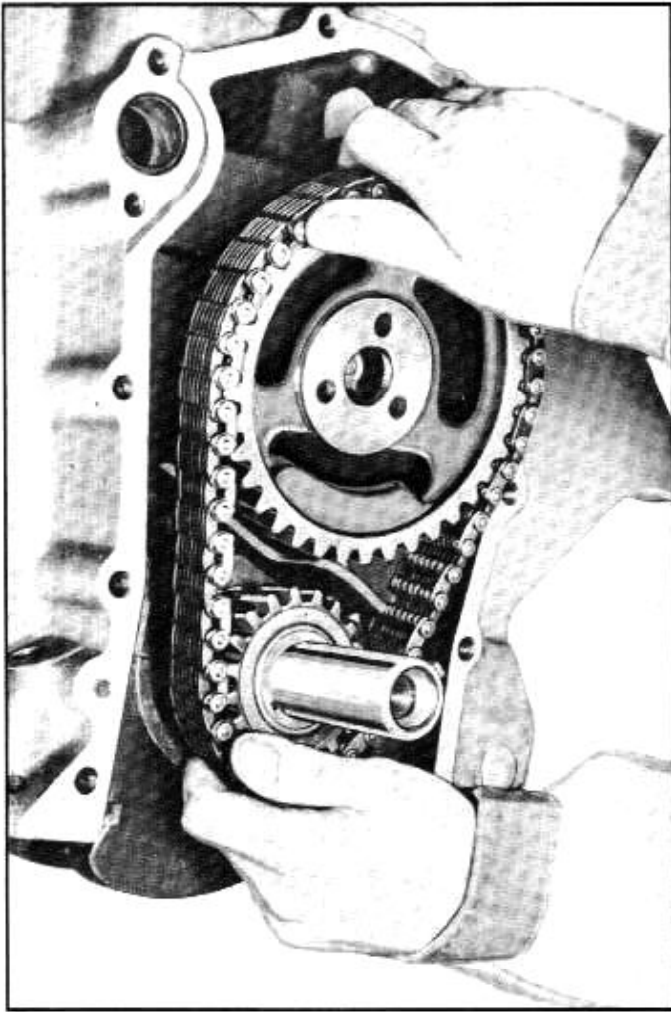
C-49—Installing Timing Chain and Camshaft Sprocket
